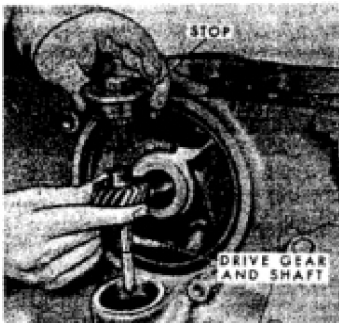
Removing the oil pump drive gear and shaft assembly. Floating shaft connecting the drive gear and shaft assembly to oil pump rotor can be removed at this time. Refer to Fig. 96.
